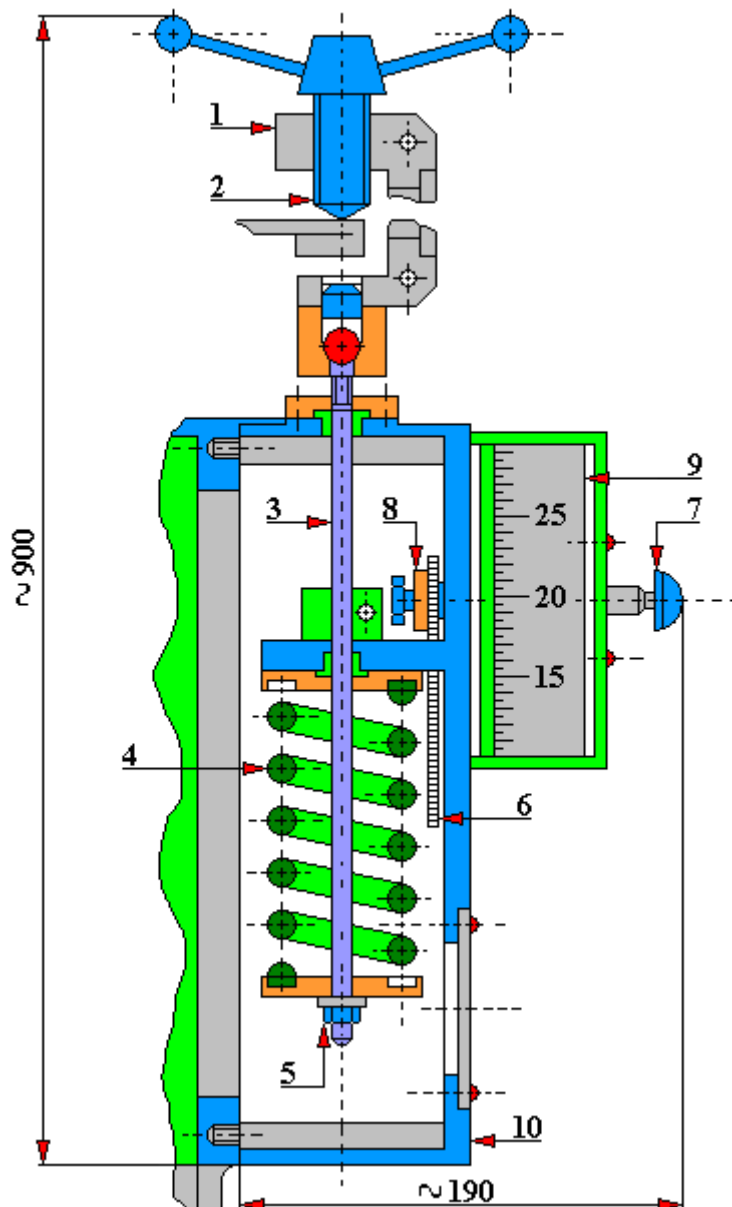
The loading mechanism used in the CML-2 (SMC-2) tribotester
